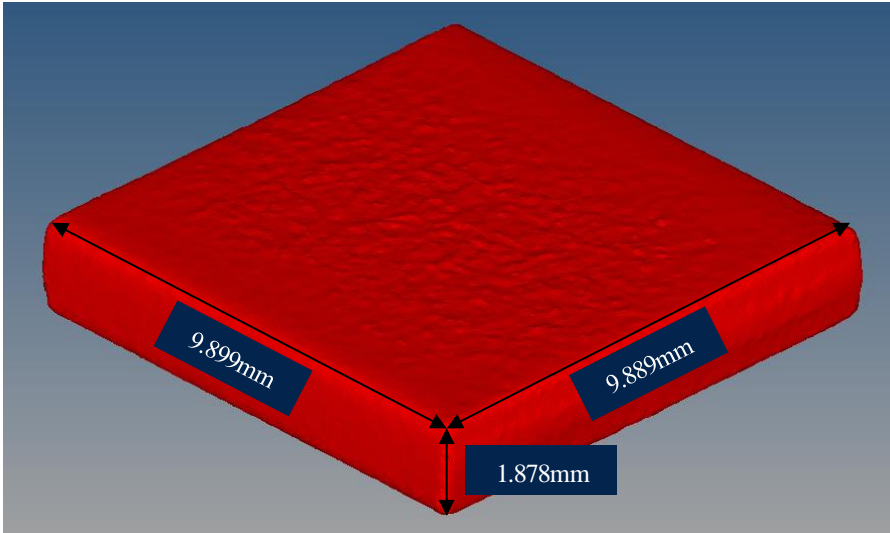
Dimensions of the Al cube measured by Vernier Caliper
